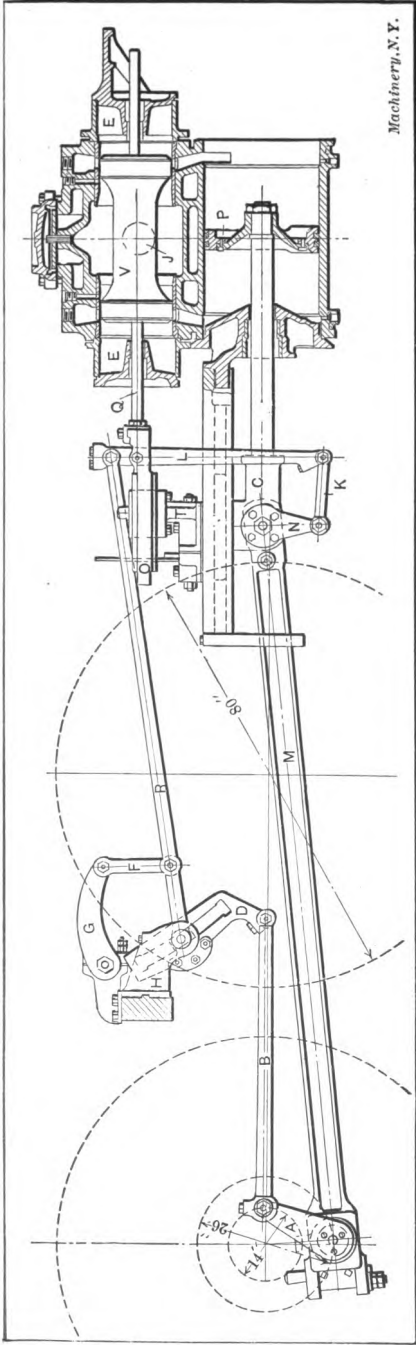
Section showing Cylinder and Walschaerts Valve Gear as used on Atlantic-type Passenger Locomotive with Inside Admission Piston Valve
